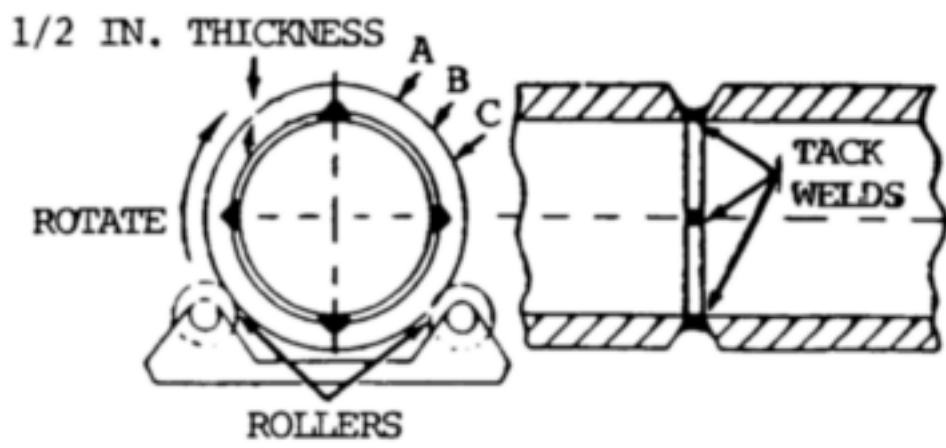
Diagram of tack welded pipe on rollers.
